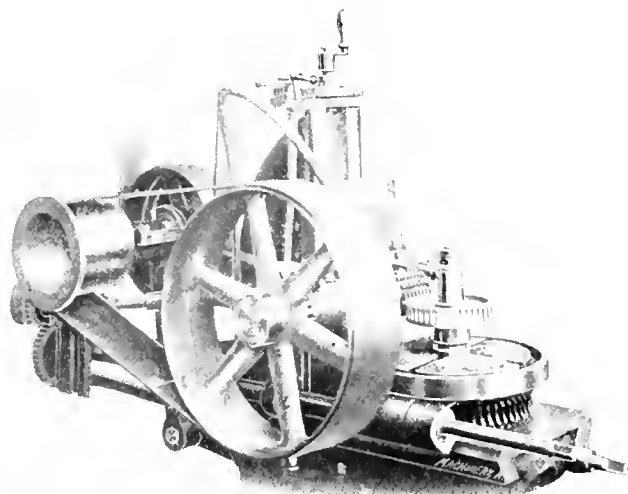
Side View showing Driving Mechanism and Change Gear Connections.
